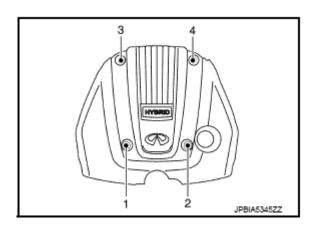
Identifying Engine Cover & Mounting Bolts With Tightening Sequence Courtesy of NISSAN NORTH AMERICA, INC.
